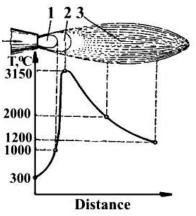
Peculiar zones of welding flame: 1 – core; 2 – welding zone; 3 – tongue (jet)
